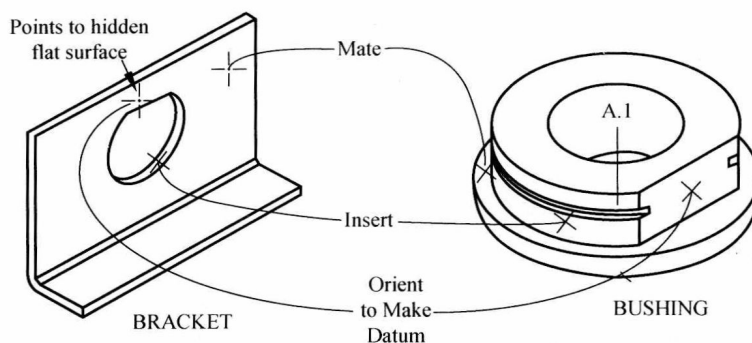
4 Constrains for assembly the BRACKET and BUSHING parts
